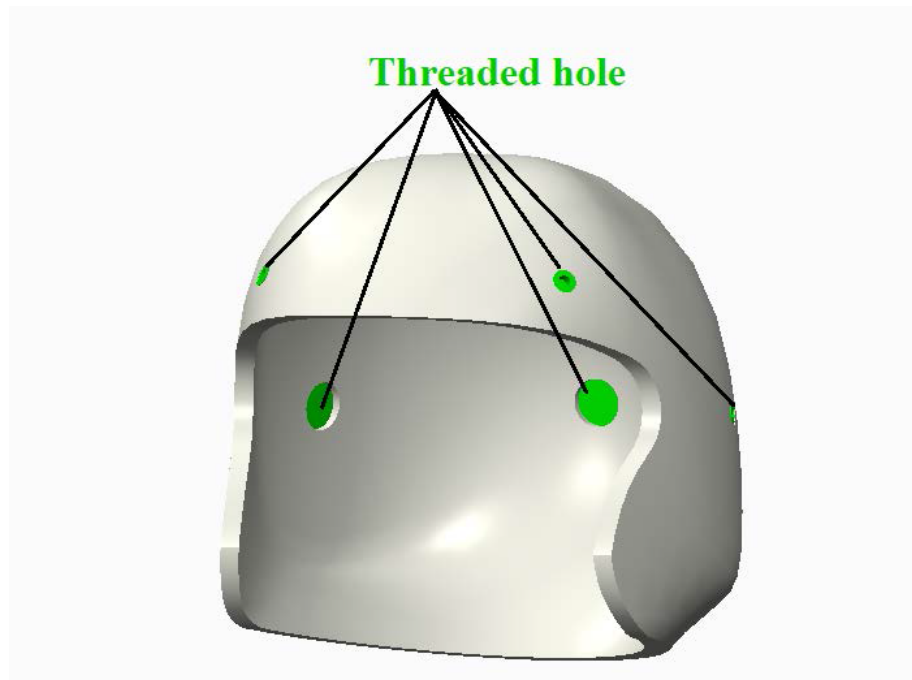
The innermost comfort foam with slots for the threaded holes.
